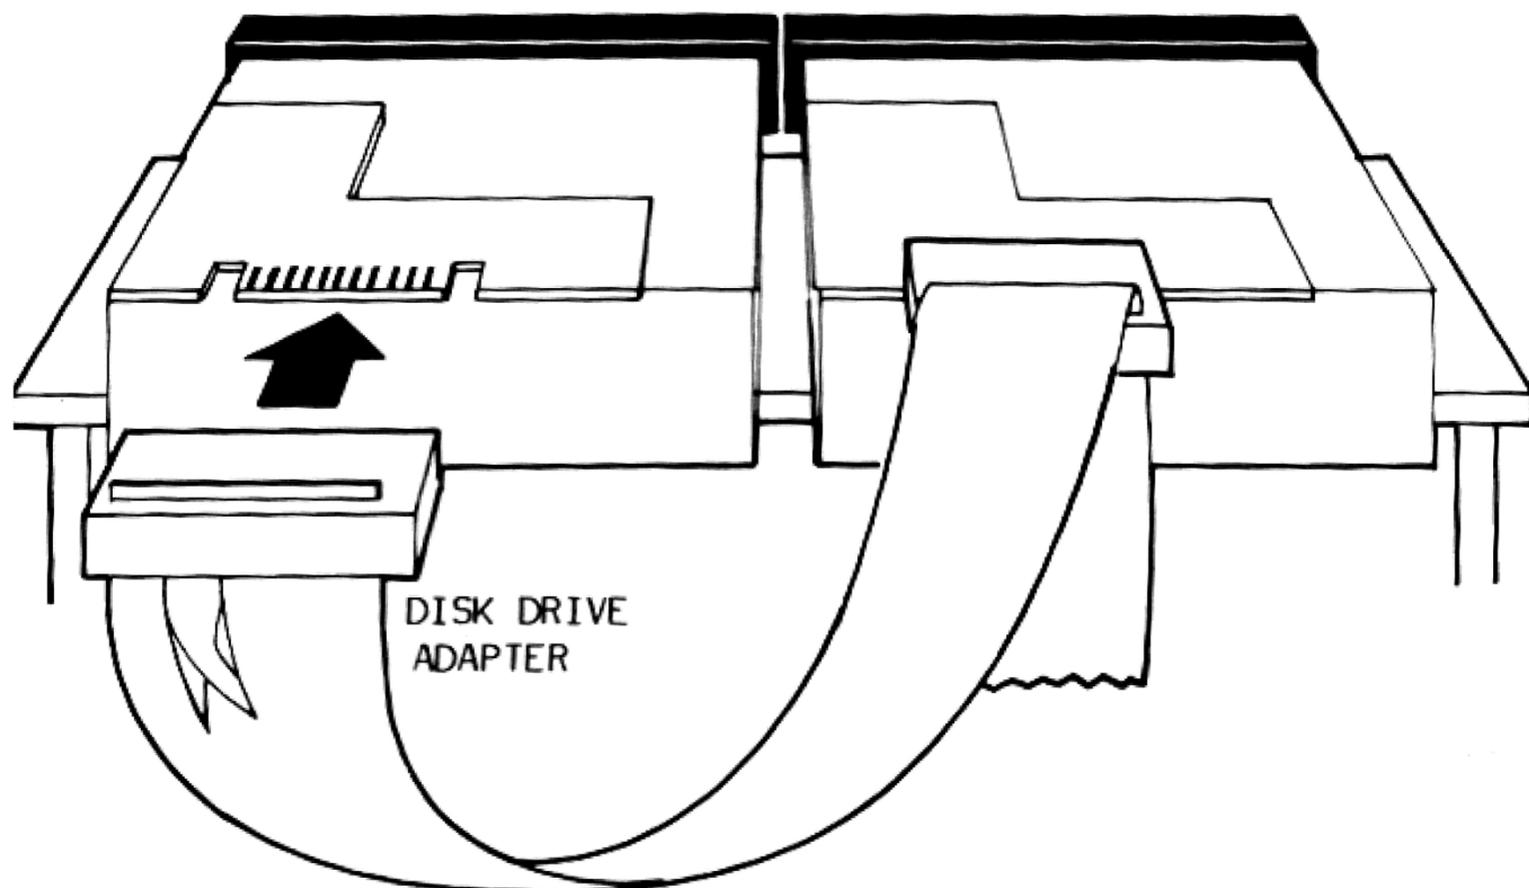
Connecting the Disk Drive Adapter to the Second Drive
